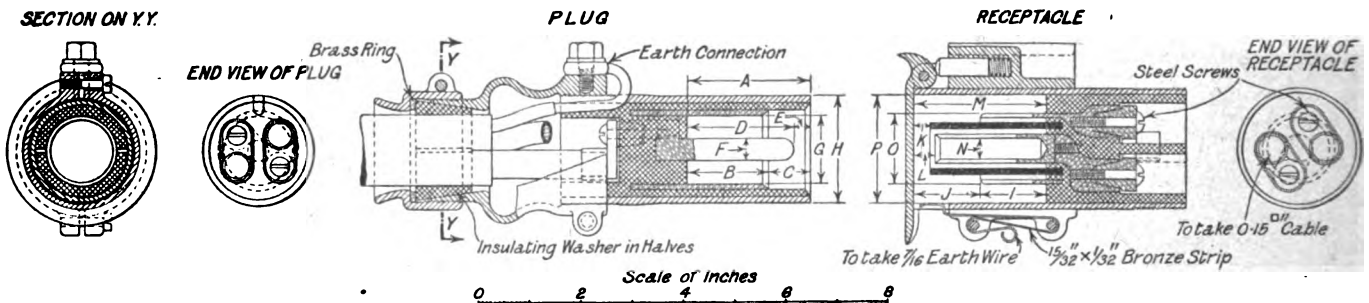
DETAILS OF STANDARD CHARGING PLUG AND RECEPTACLE.
